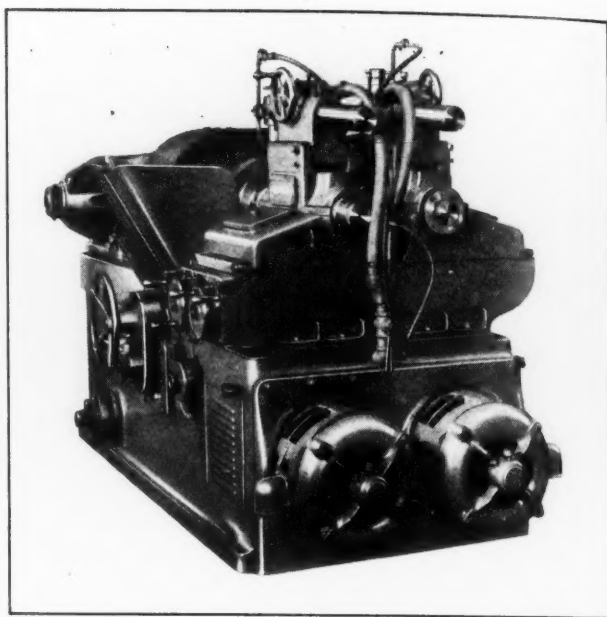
End View, Showing Arrangement of the Two Wheel-heads
